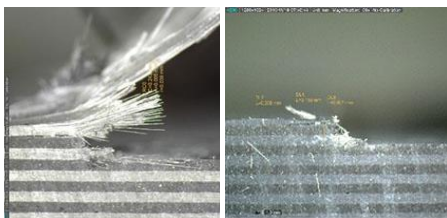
CFRP surface. (Left) Bur generated by tin coated milling tool. (Right) Bur removed by ceramic brush tool.
